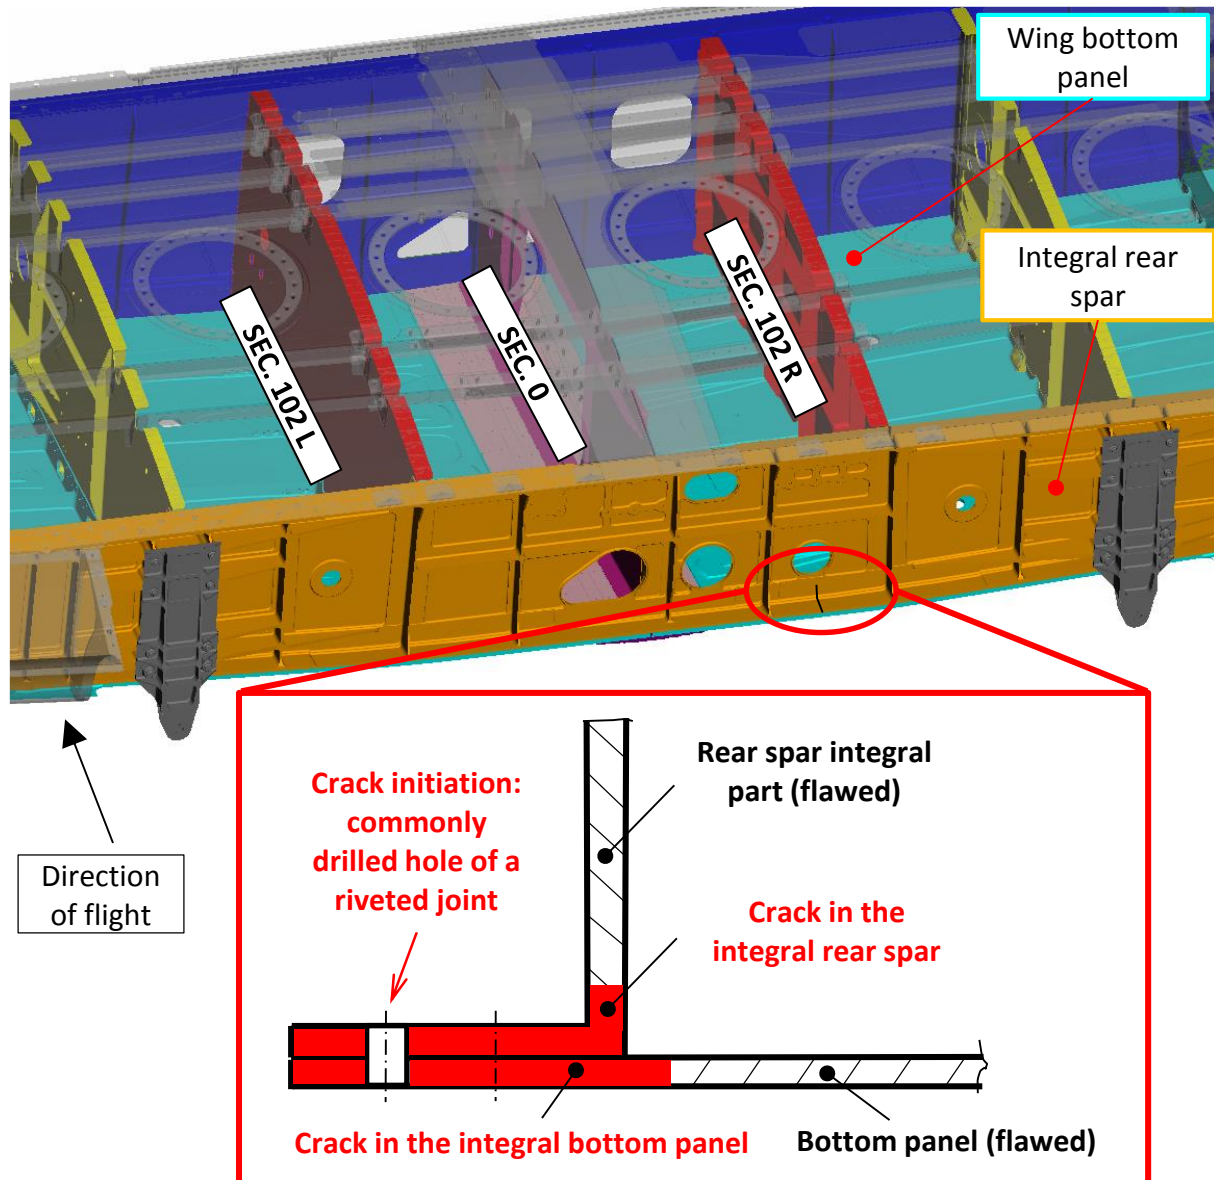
An example of a scenario in damage tolerance analysis of the L 410 NG wing. Cracks are initiated in rivet holes, both in the integral rear spar and bottom panel between section 0 and 102 R.
